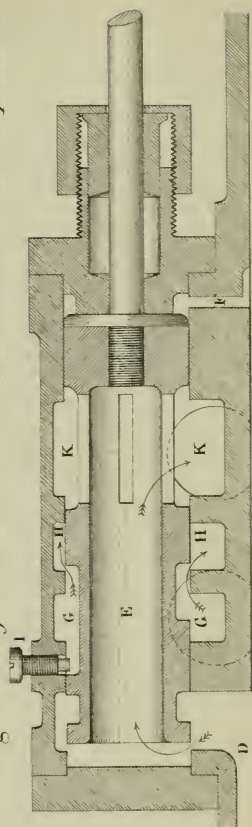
Longitudinal Section enlarged of Steam Cylinder and Valve.
